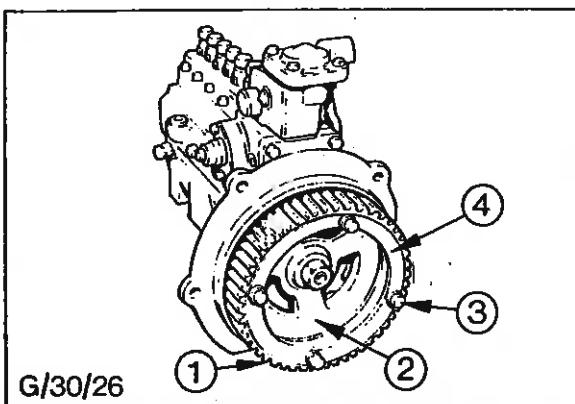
Injection Pump Drive Gear - Automotive and G.P. Governed Pumps Only
